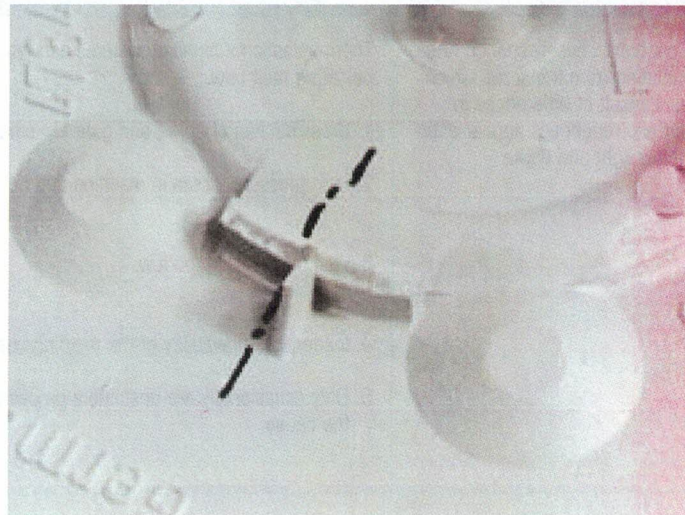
Demolding fracture; an excessively large undercut causes the bracket to be torn off
